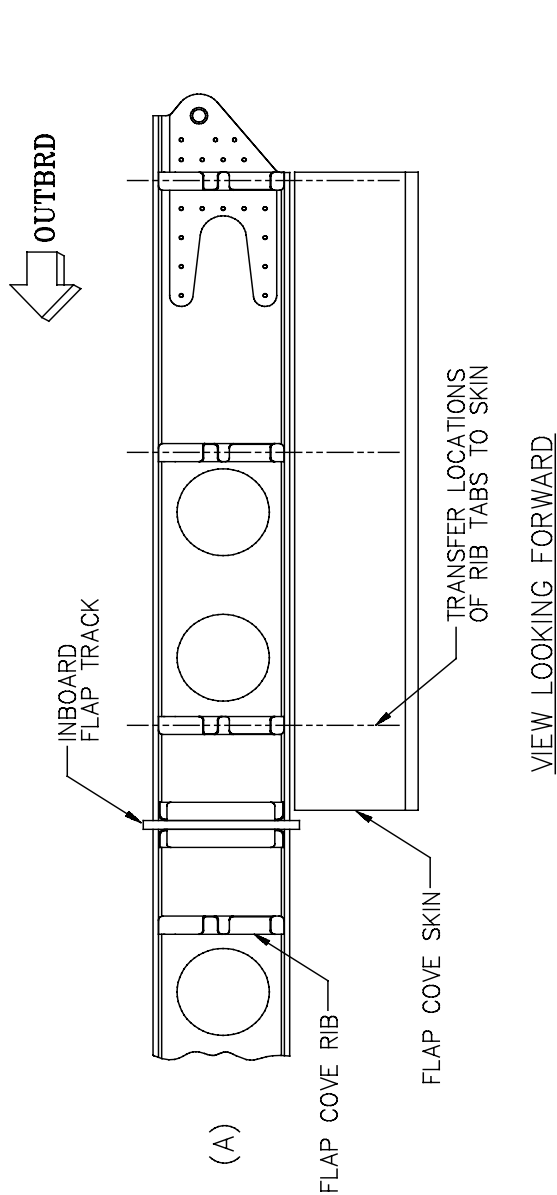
Marking Rivet Hole Locations on the Cove Skins
